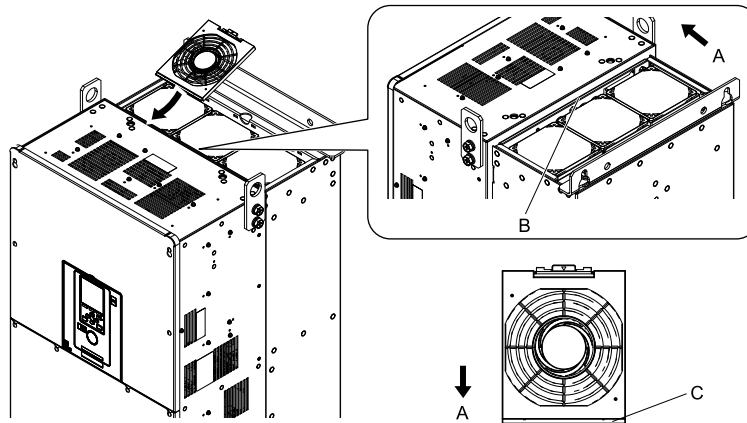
Put the Cables and Connectors in the Drive Recess
